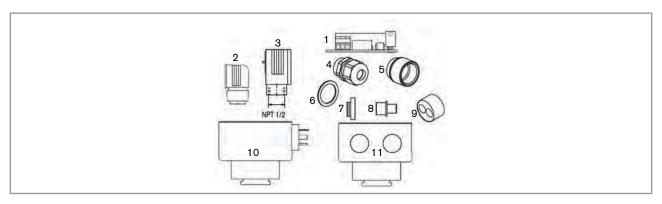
Exploded view of the spare parts of a flowmeter 8035 or a flow transmitter SE35
